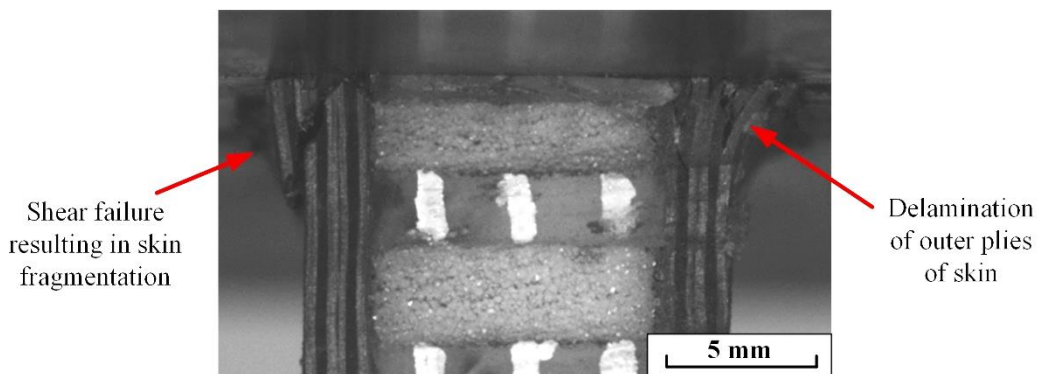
Initial failure of facesheets at uppermost edge of the test coupon (Coupon C8).
